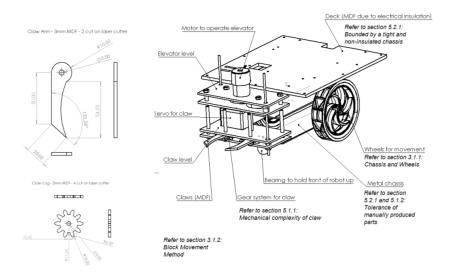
a) CAD drawings of claw components b) CAD drawing of constructed claw on robot
